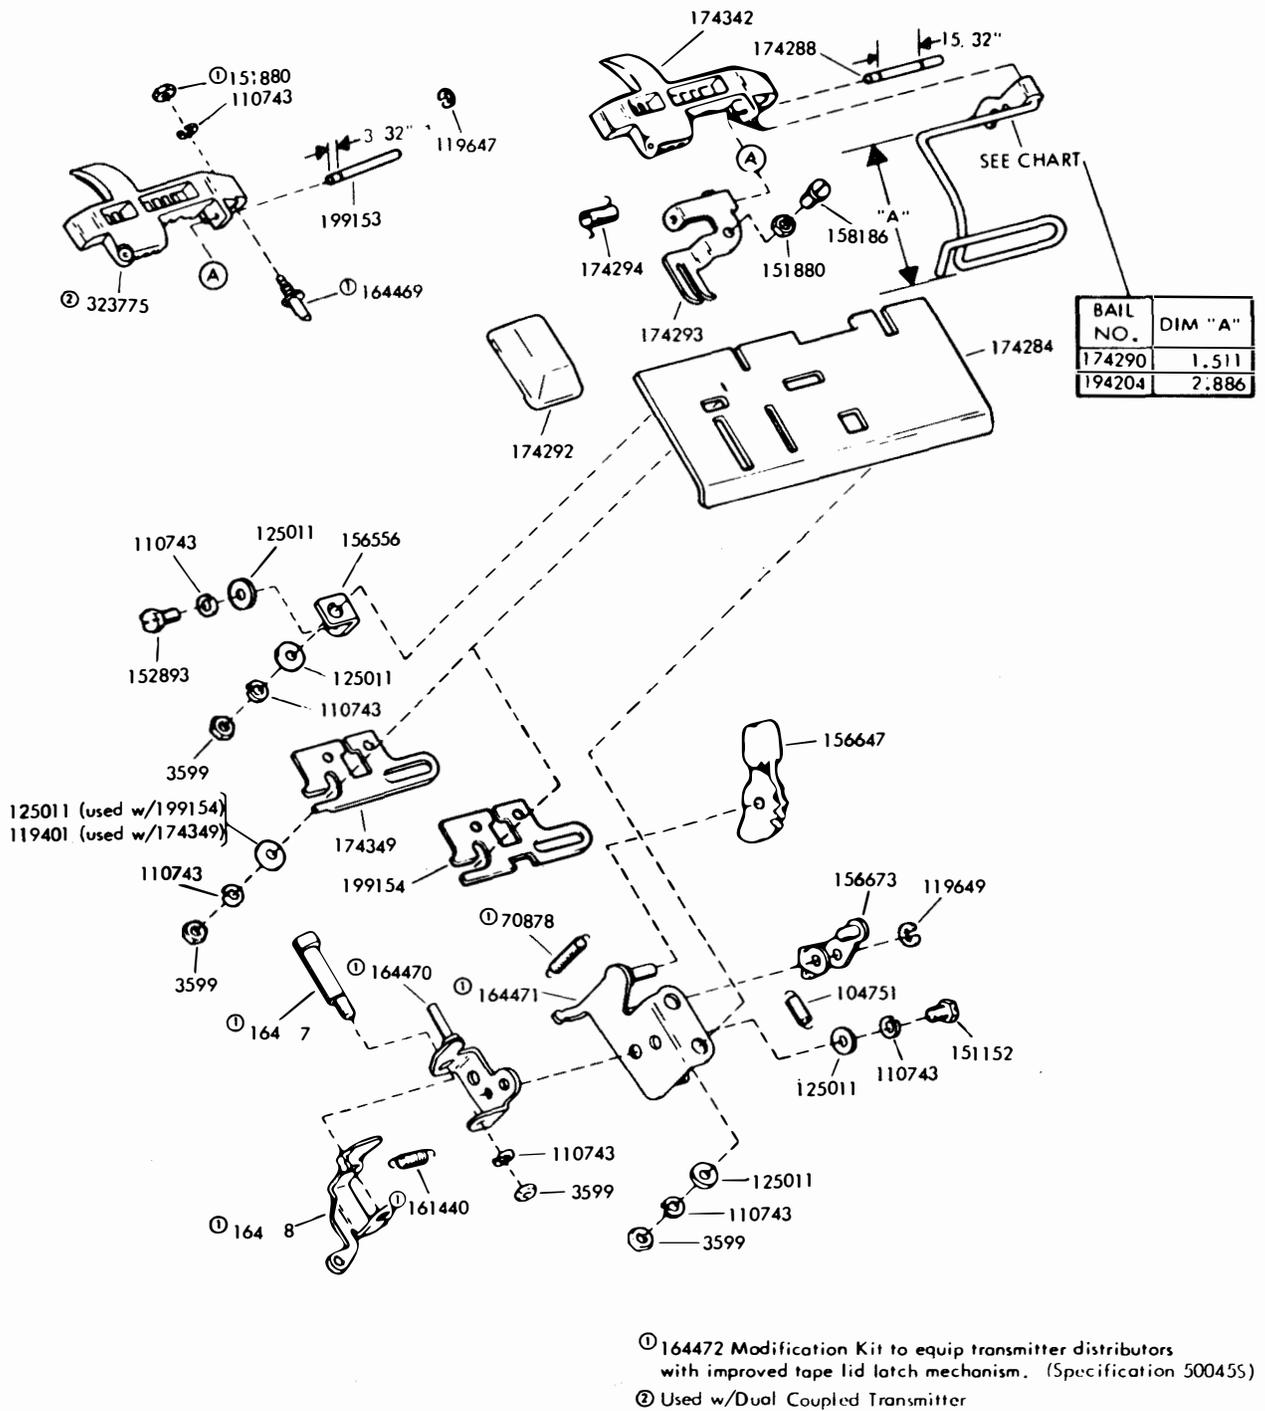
Tape Guide Plate Mechanisms (Sheet 2 of 3)
